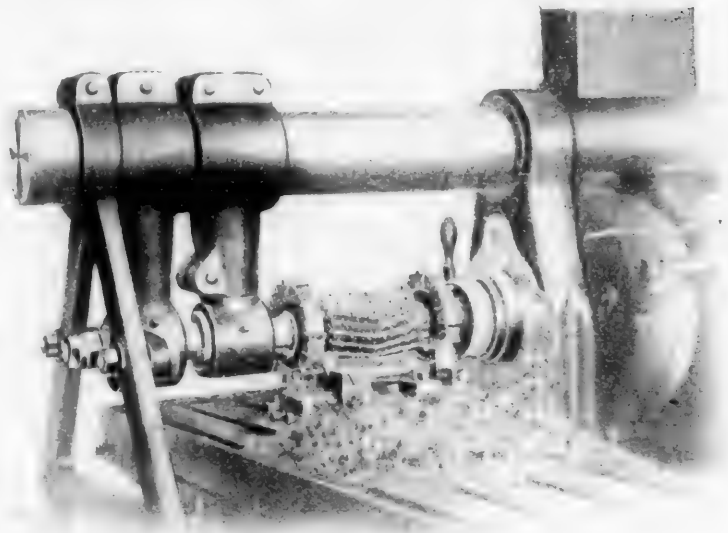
METHOD SUGGESTED FOR MILLING DRIVING BOX SHOES.
